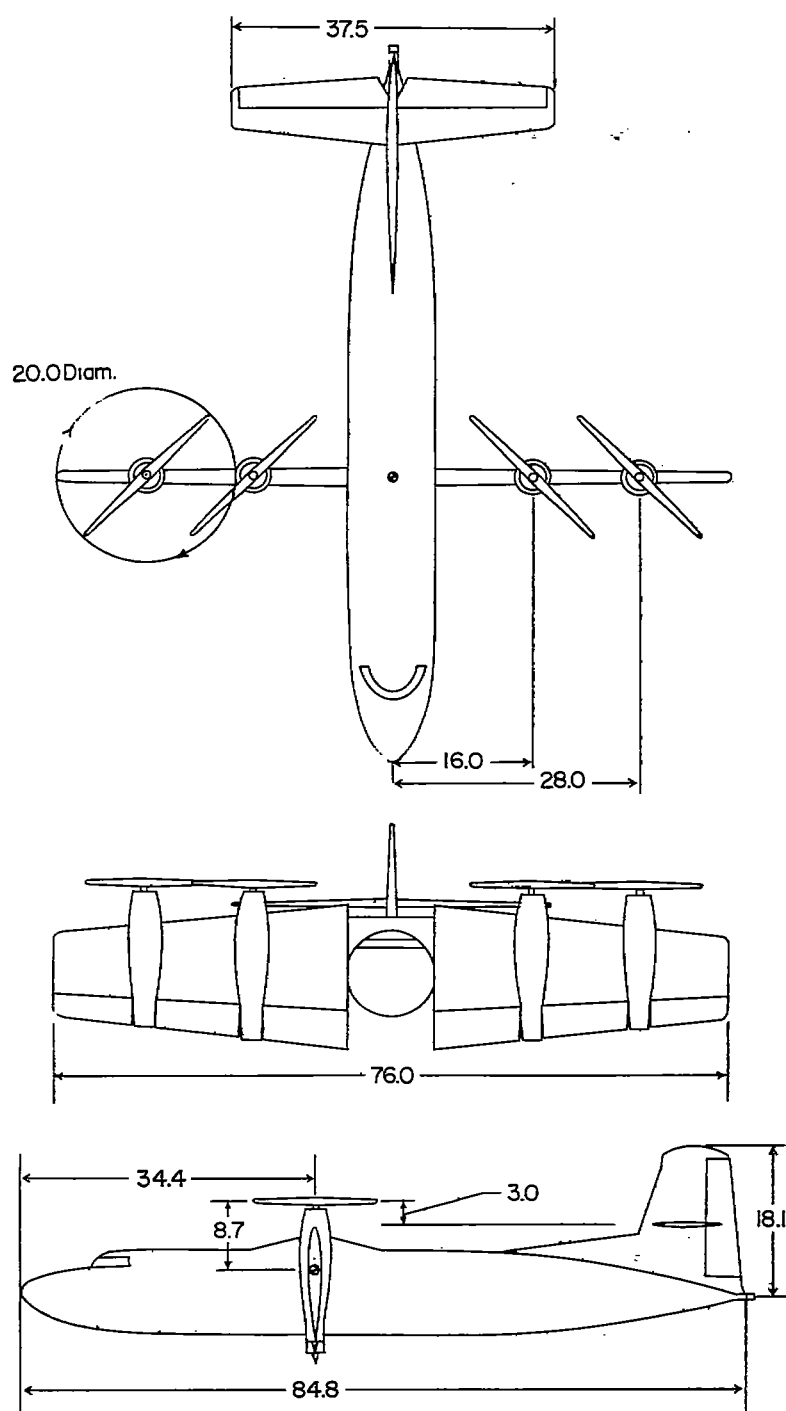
Three-view drawing of model tested. All dimensions are in inches.
